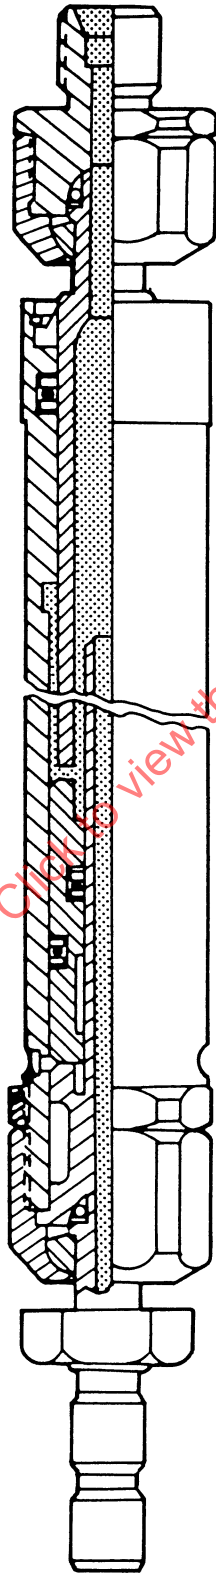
HYDRAULIC EXTENSION UNIT
